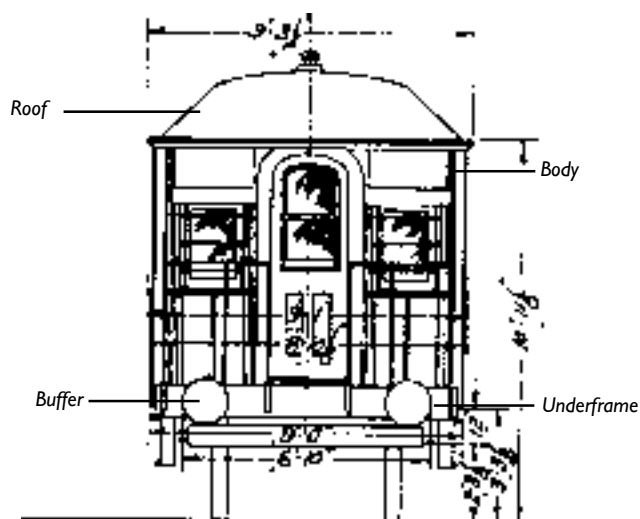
End Elevation of an 'American' or 'end Platform' Carriage showing its major structural components. Source: SRAO
